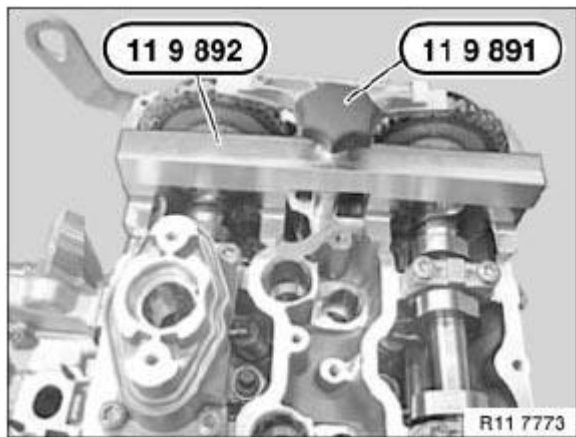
Identifying Special Tools (11 9 892 And 11 9 891)
